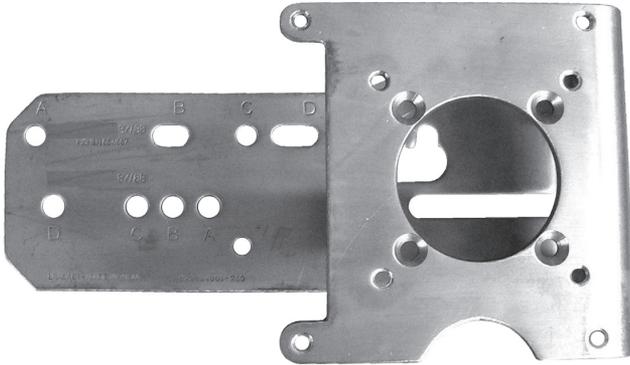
Reciprocating Valve Mounting Bracket for Standard Lever
